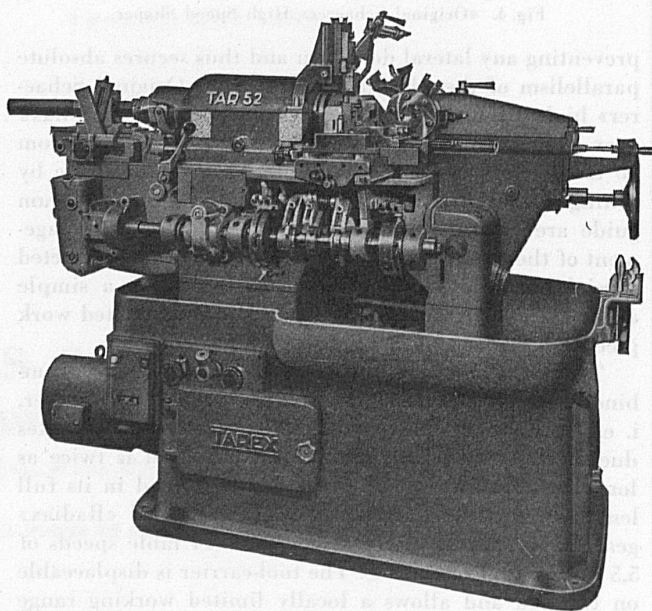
TAR One Spindle Automatic Turret Lathe.
